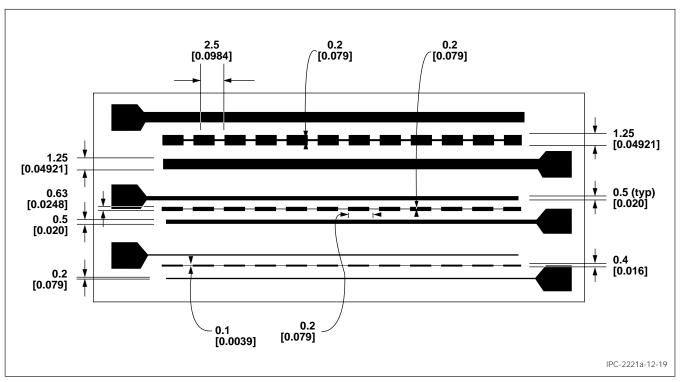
Test Coupon N, Surface Mounting Bond Strength and Peel Strength, mm [in]
